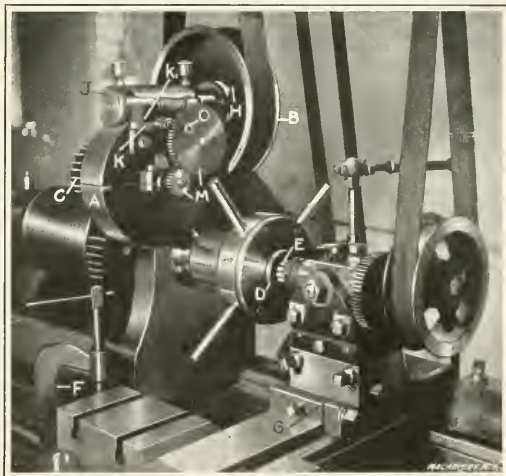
New England Butt Co.'s Thread Milling Attachment for the Lathe milling the coarse thread on the outside of the ogive for 70-millimeter shrapnel shells, and has now been in operation for a sufficient length of time to fully demonstrate its ability to give satisfactory results as regards both finish and rate of production.
